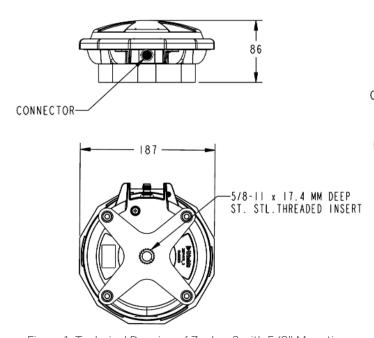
Technical Drawing of Zephyr 3 with 5/8" Mounting PN 125000-30-INT
